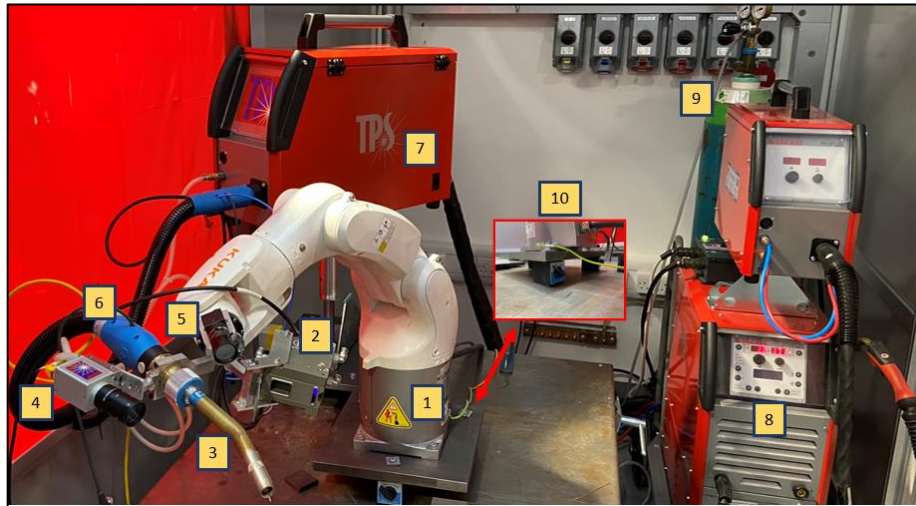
Modularized robotic welding setup consisting of a magnetic-based KUKA-KR3, sensors and a flexible mounting robotic wire feeder.
